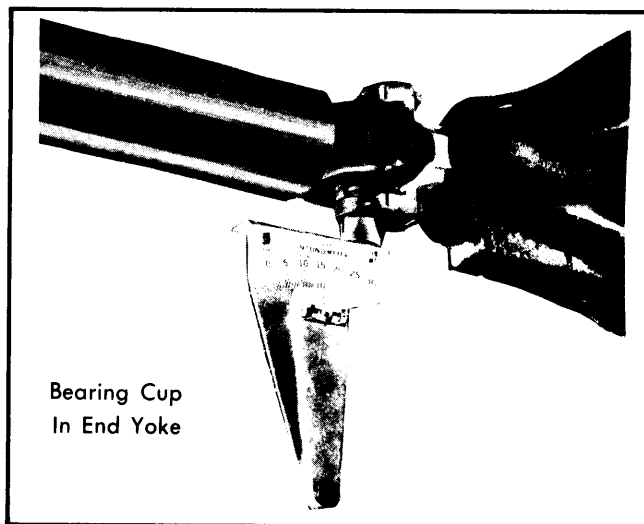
Measuring Angle at Rear of Propeller Shaft
